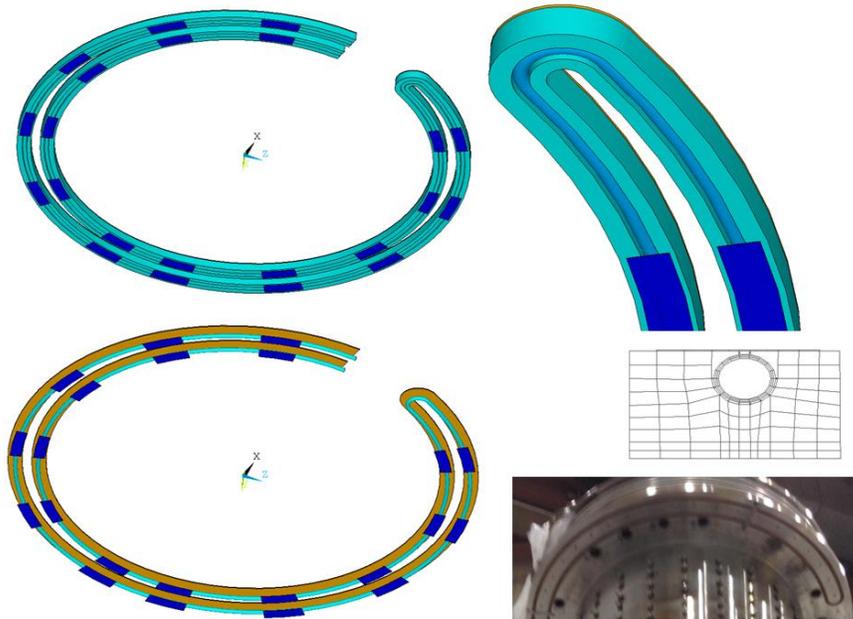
Horizontal Divertor Plate Cooling Tube Model
